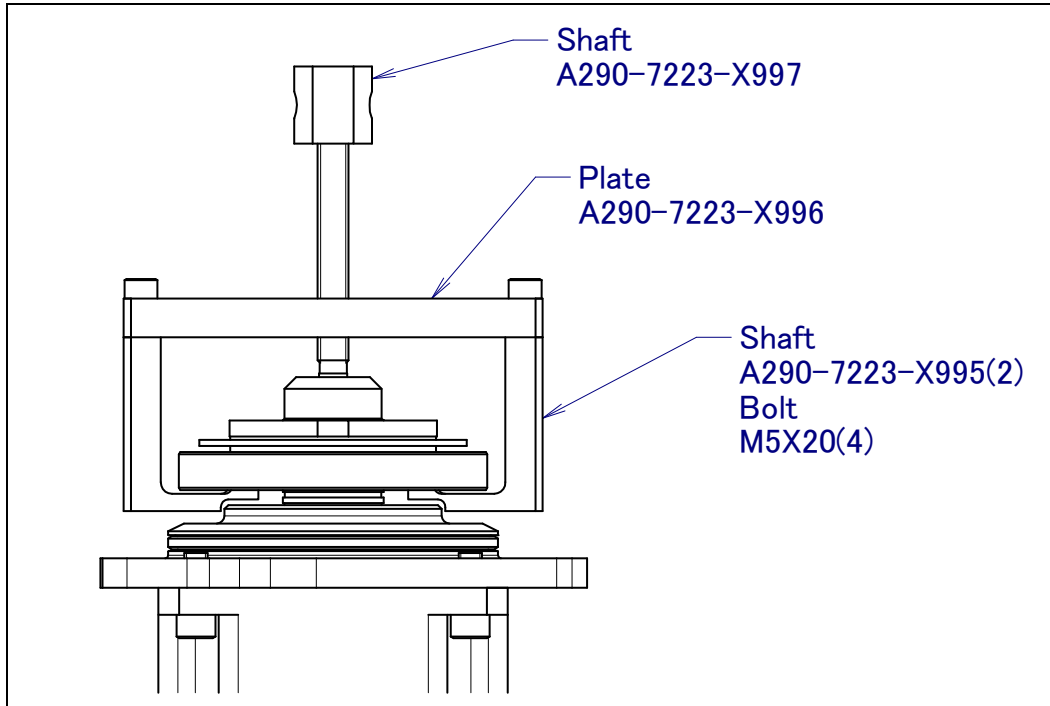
(b) Disassembling wave generator fixture (common to J1 to J3-axes)
